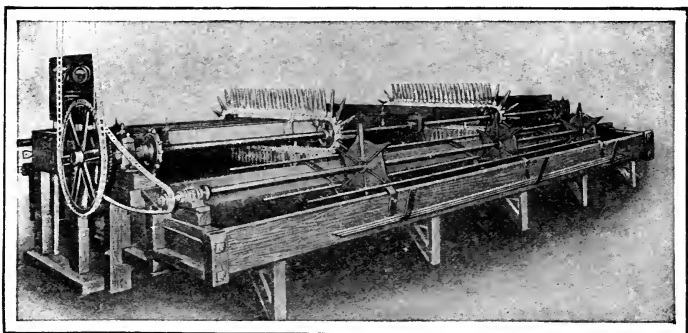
POTTHOFF TUBE GALVANIZING MACHINE
